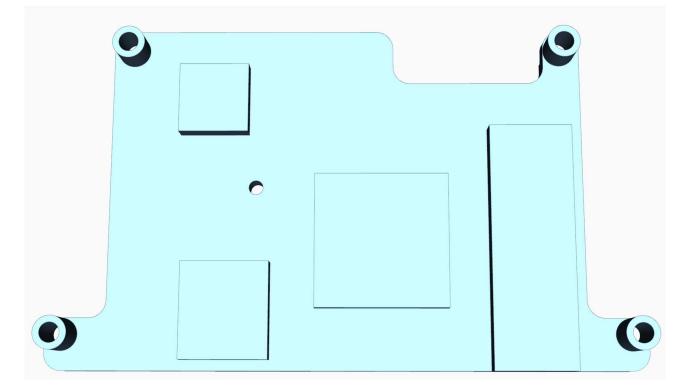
Heat Spreader 94-800913-3 Bottom Side View (faces SOM)
